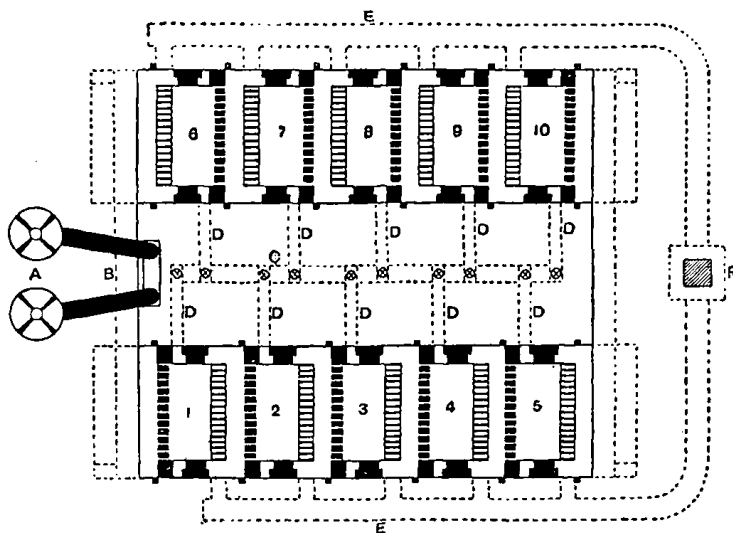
Horizontal section of Dunnachie's gas-fired kiln.
